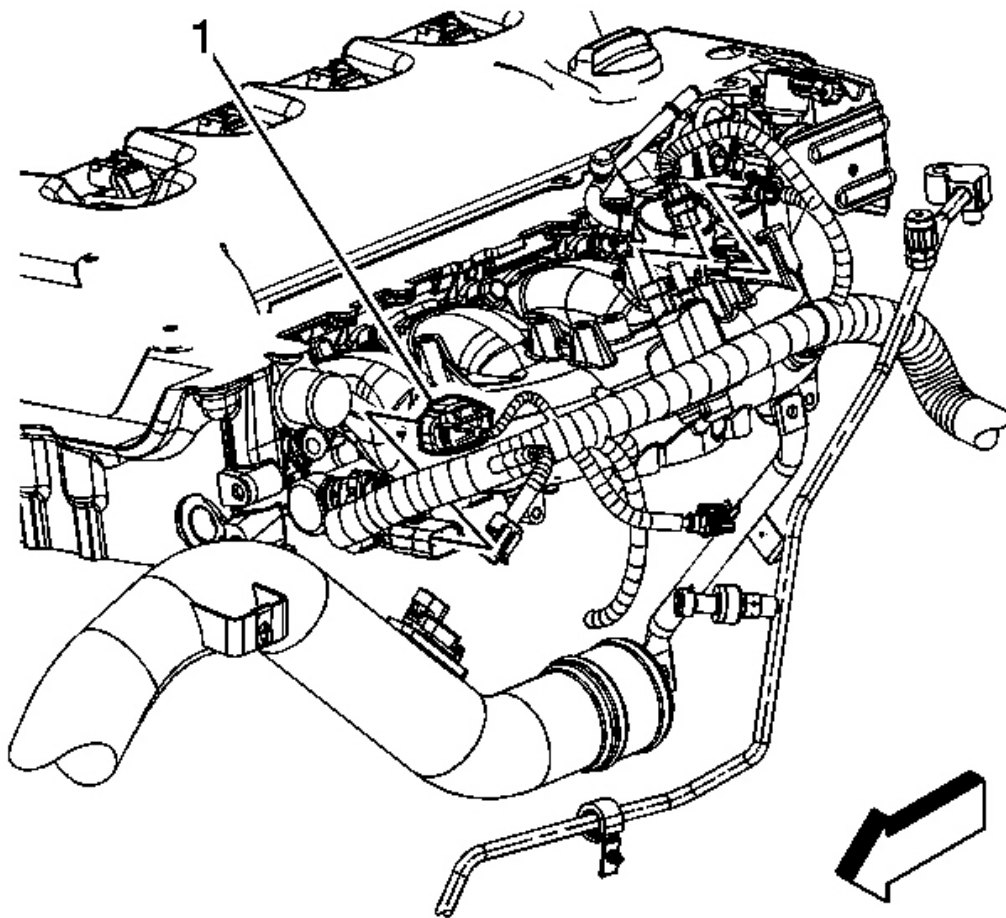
Fuel Injector Wiring Harness Electrical Connector
